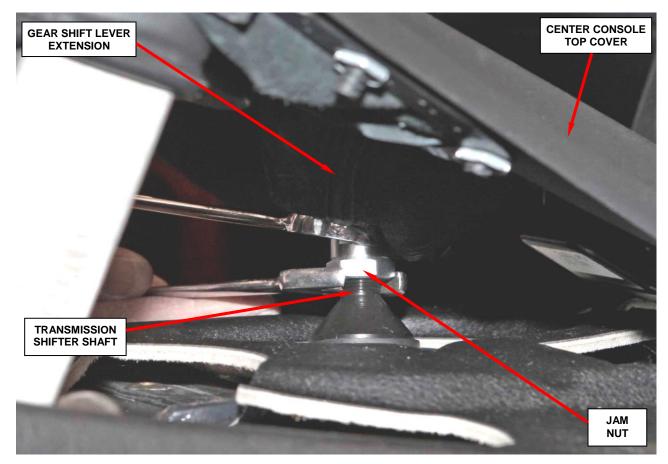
Install Gear Shift Extension and Tighten Jam Nut
